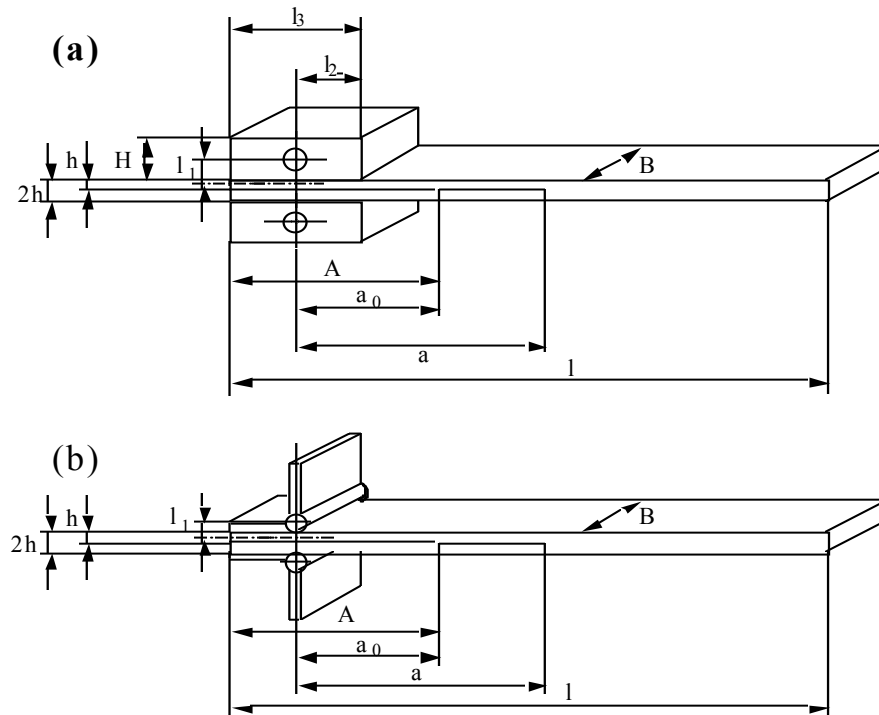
Geometry for the DCB specimen: a) load-blocks; b) piano hinges [126].
